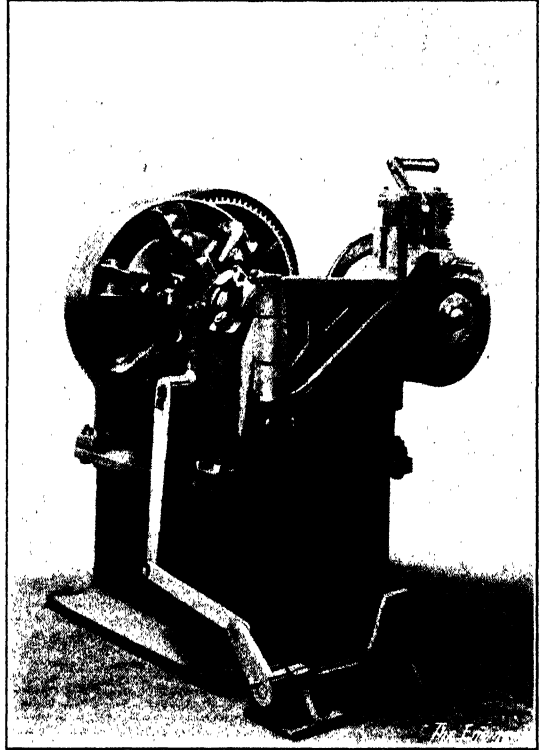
STRINGING-UP MACHINE—ROBERTSON.
